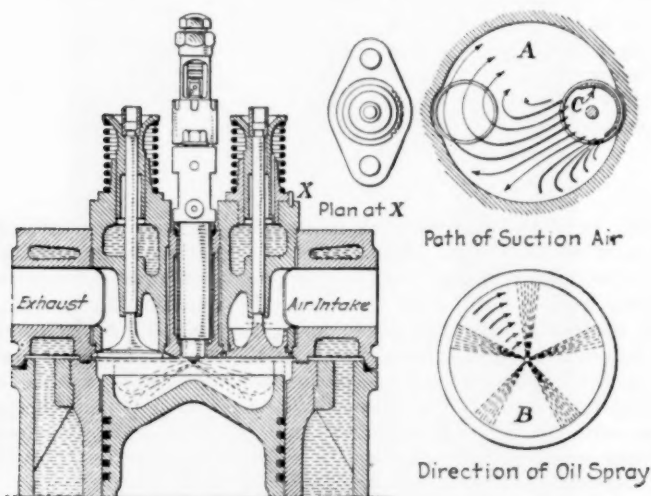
COMBUSTION CHAMBER OF HESSELMAN ENGINE
